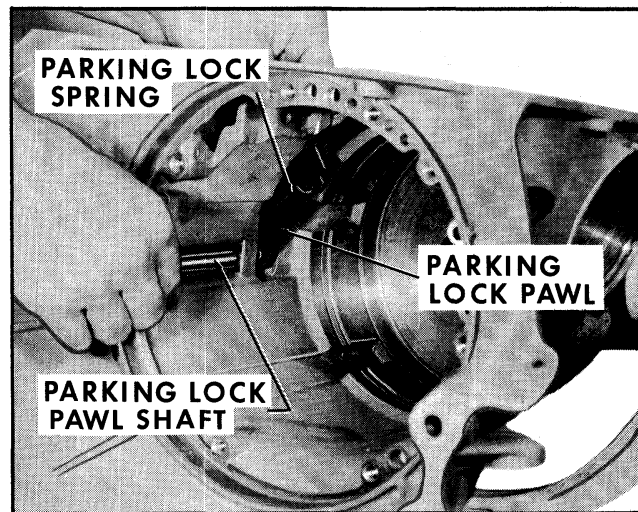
B-68 Removing Parking Lock Pawl Shaft
